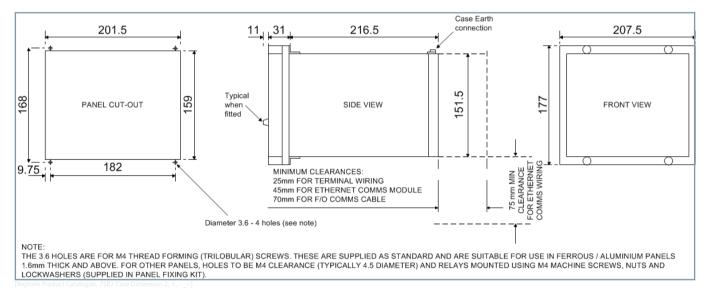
/10 E8 Case overall dimensions and panel drilling details (All dimensions are in mm)
